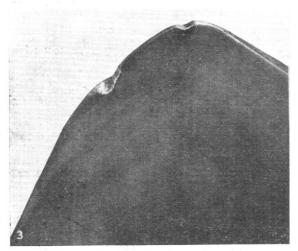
Maximum acceptable damage, only minor blending needed to remove burrs from sides of the vane; protect bared metal with lacquer.
